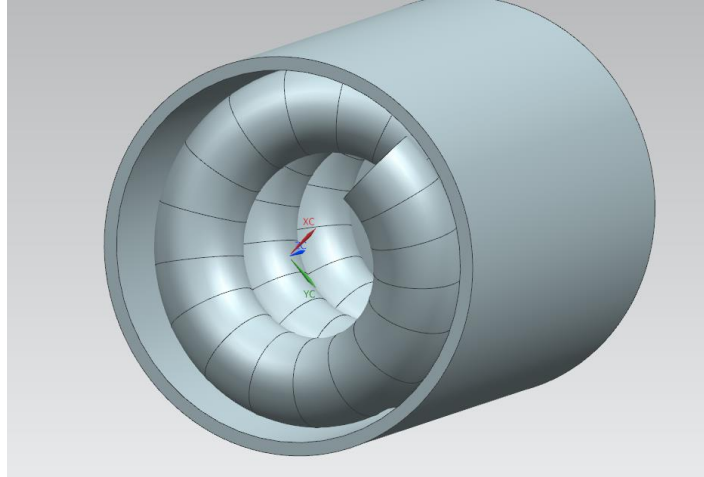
Model of Helical Coiled Tube Heat Exchanger
